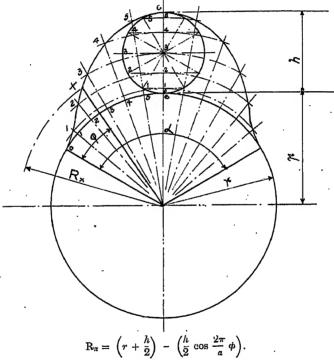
Graphic Method of drawing Polarsinoid Cam.
